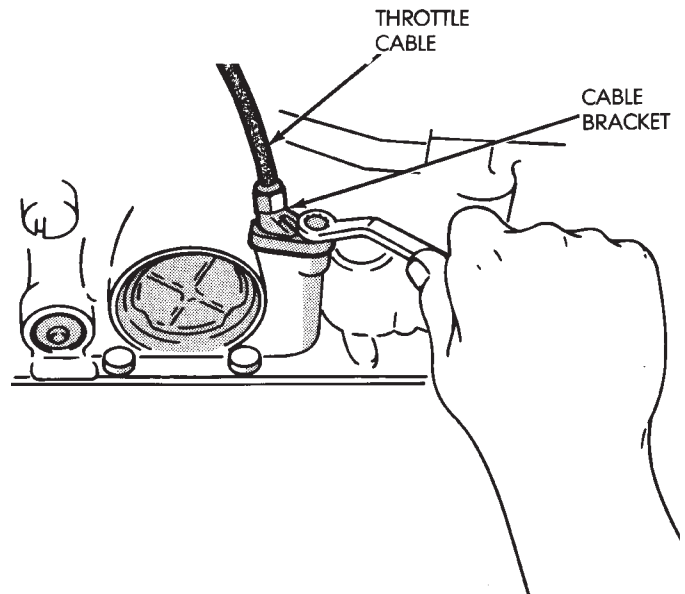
Removing/Installing Transmission Throttle Cable And Bracket
